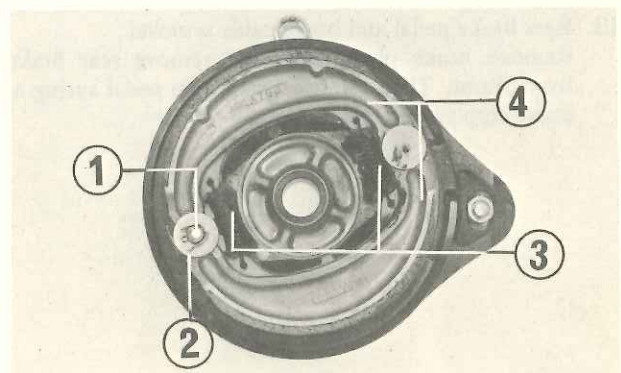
(1) Brake camshaft (2) Cotter pin (3) Brake shoe springs (4) Brake shoes
